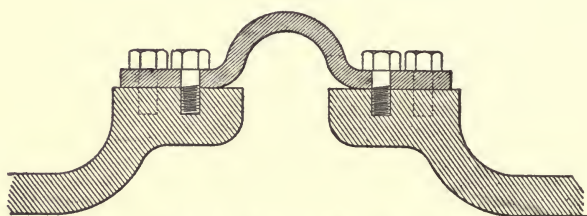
Enlarged Section of Leavitt Steam Jacket.
